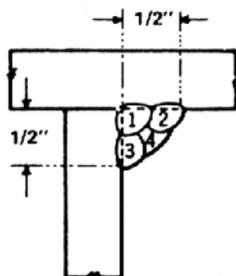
Multilayer Deposit - Overhead Tee Weld
